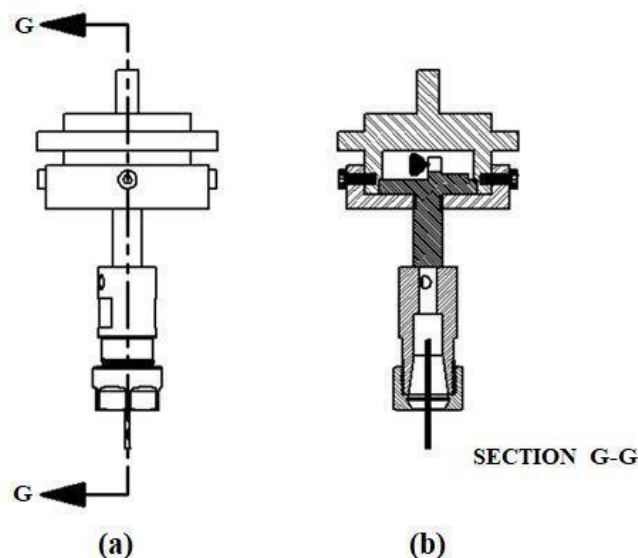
(a) CAD model and (b) pictorial view of the vibrating tool holder
